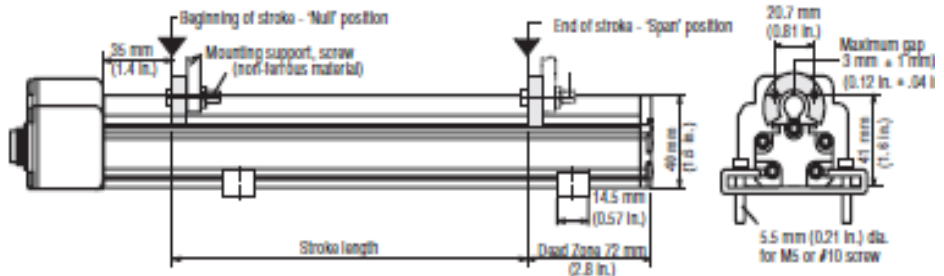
E-Series Model EP sensor dimension reference (Shown with Style M open-ring magnet)
